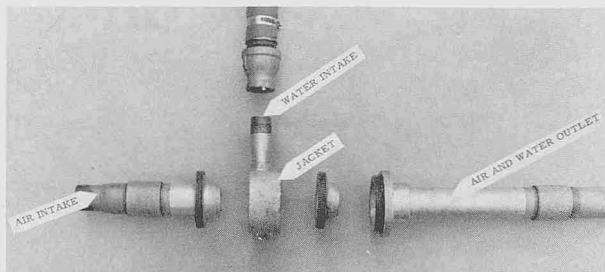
Disassembled cone assembly of hydraulic sampler.
